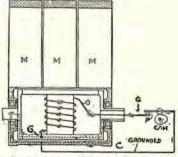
Sectional view of low-tension magneto. (O) is the primary winding on the shuttle-type armature, of which there are several layers of coarse copper insulated wire (only one layer shown). This wire connects with a contact-breaker (P) and (G).
